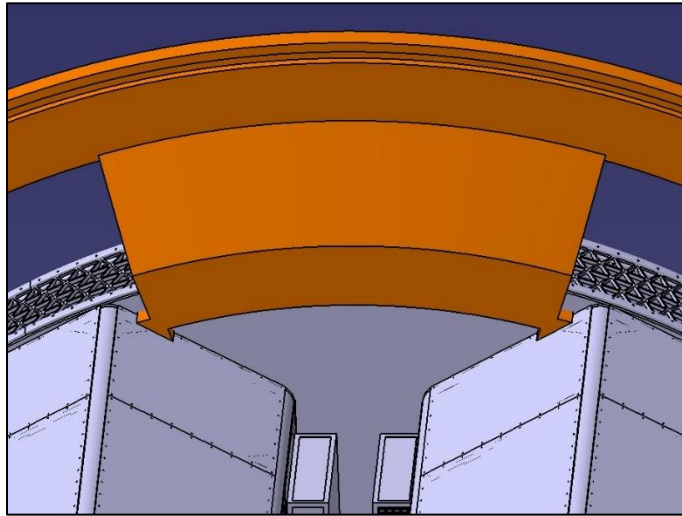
Bottom View of the U-shape Fixture with VASIMR in Position. The Extended Tabs Restrict the VASIMR to Form a Rotational Movement
